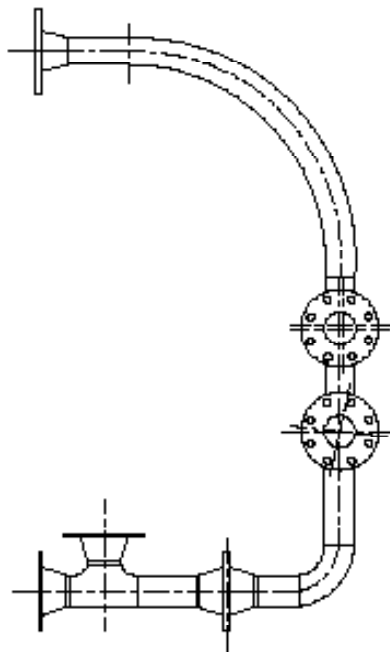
Dimensional and alignment checks for piping assembly
